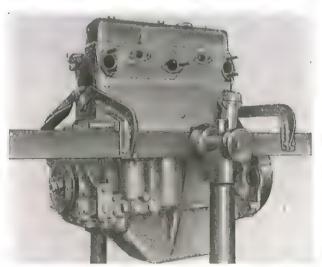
Left-side view of engine on rotary stand ARR 2216 (Note the front brackets position).
